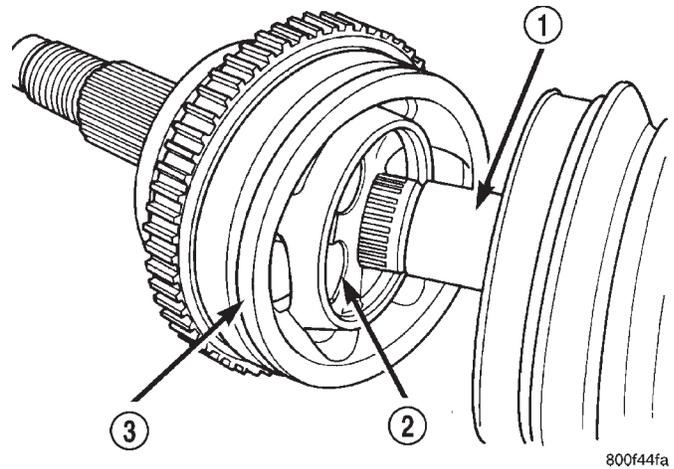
Outer C/V Joint Correctly Installed on Interconnecting Shaft
